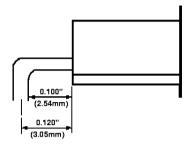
Minimum Bend Radius of 40 Mil (1.02 mm) Pins
